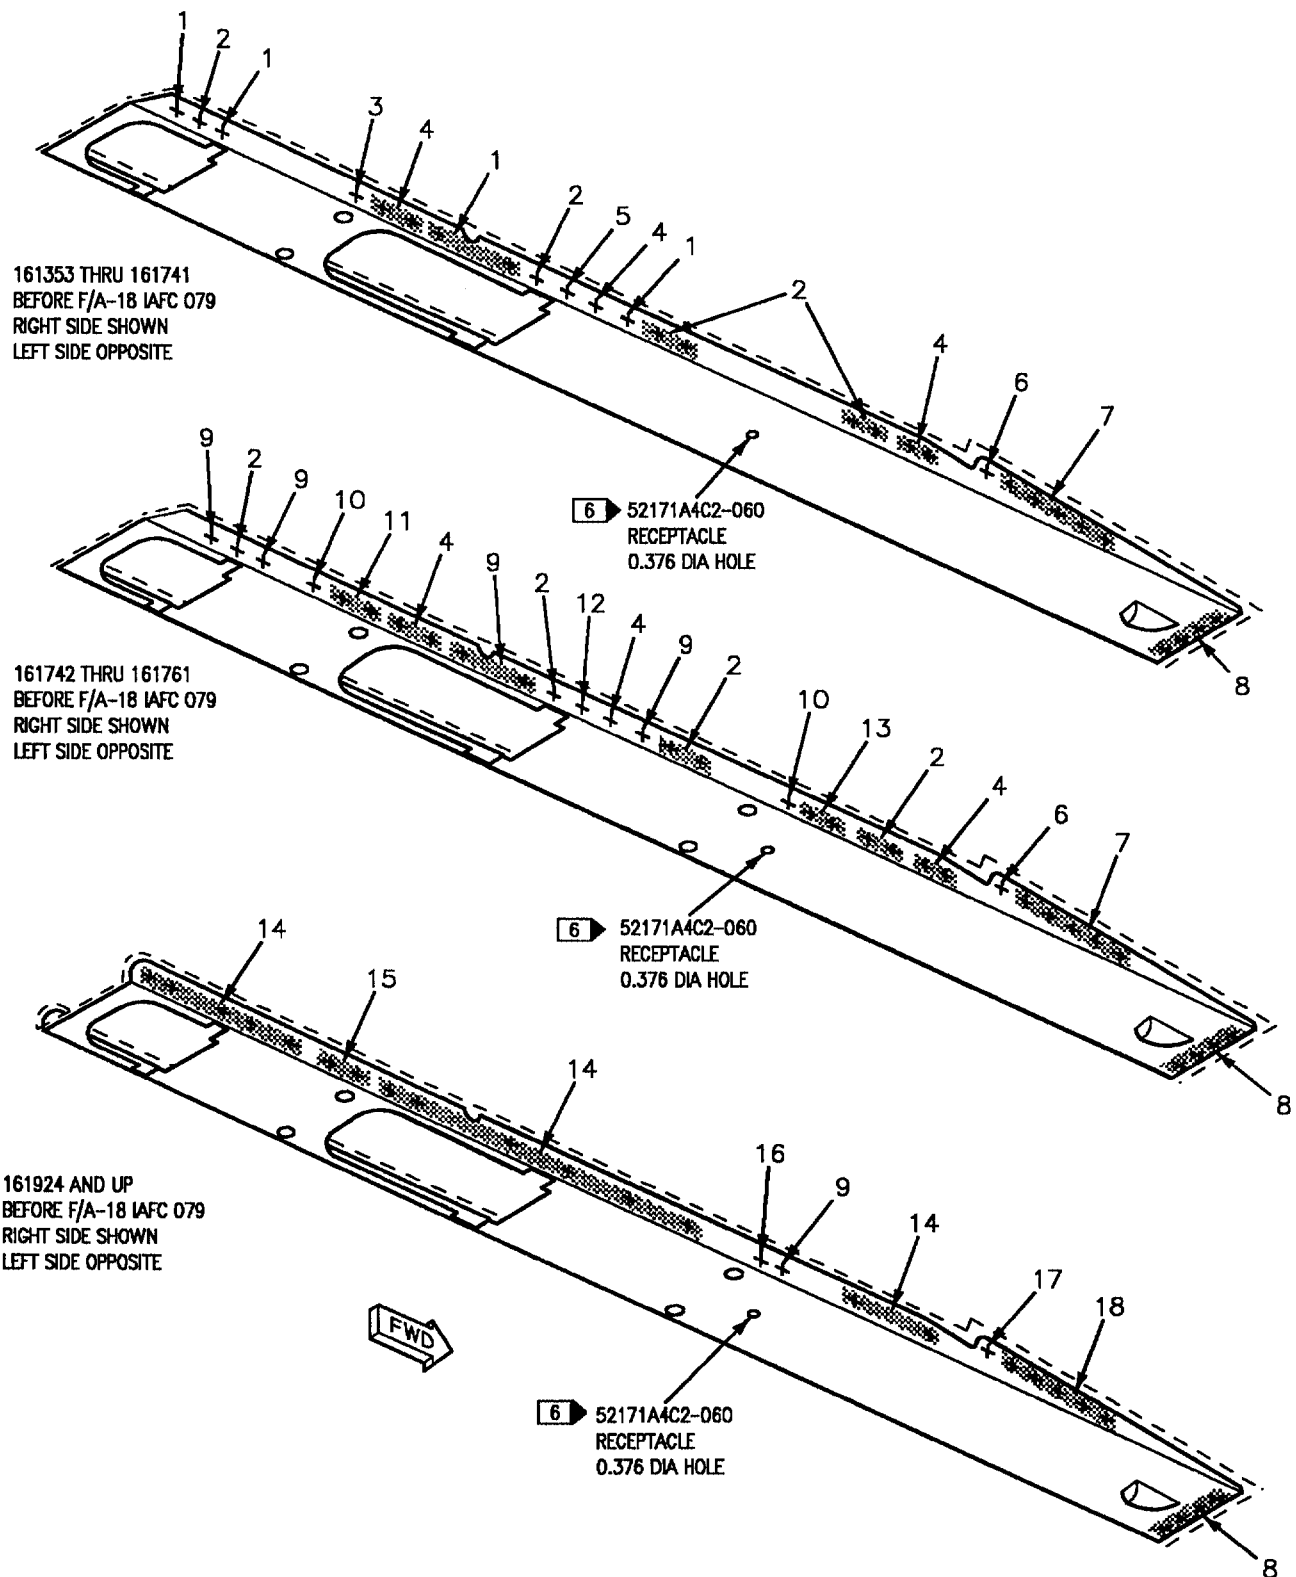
Fairing 74A332518 Replacement (Sheet 1)
